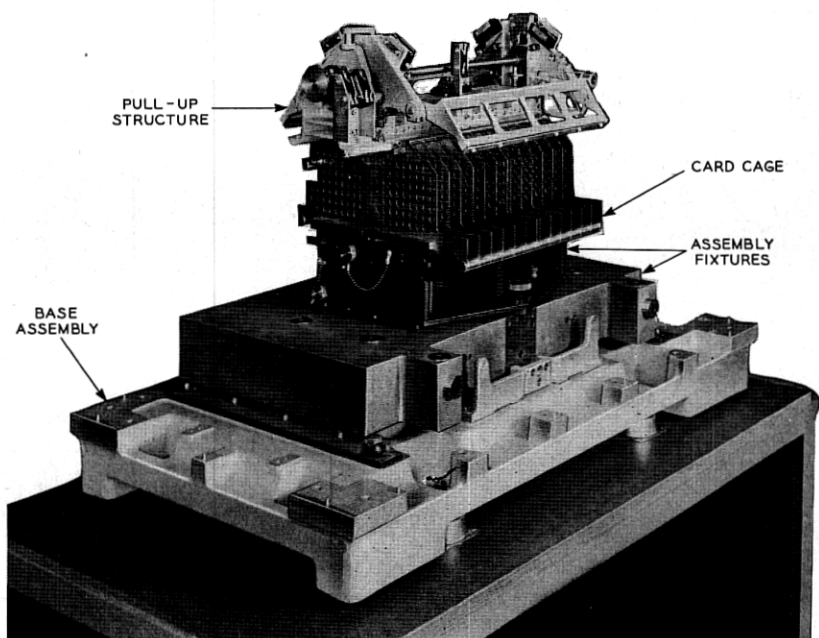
Base and assembly fixture together with card cage and pull-up superstructure.
